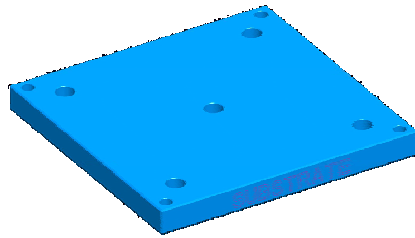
Model of Machined Substrate with 4 Dowel Holes for Locating and 5 Bolt Holes for Fastening
